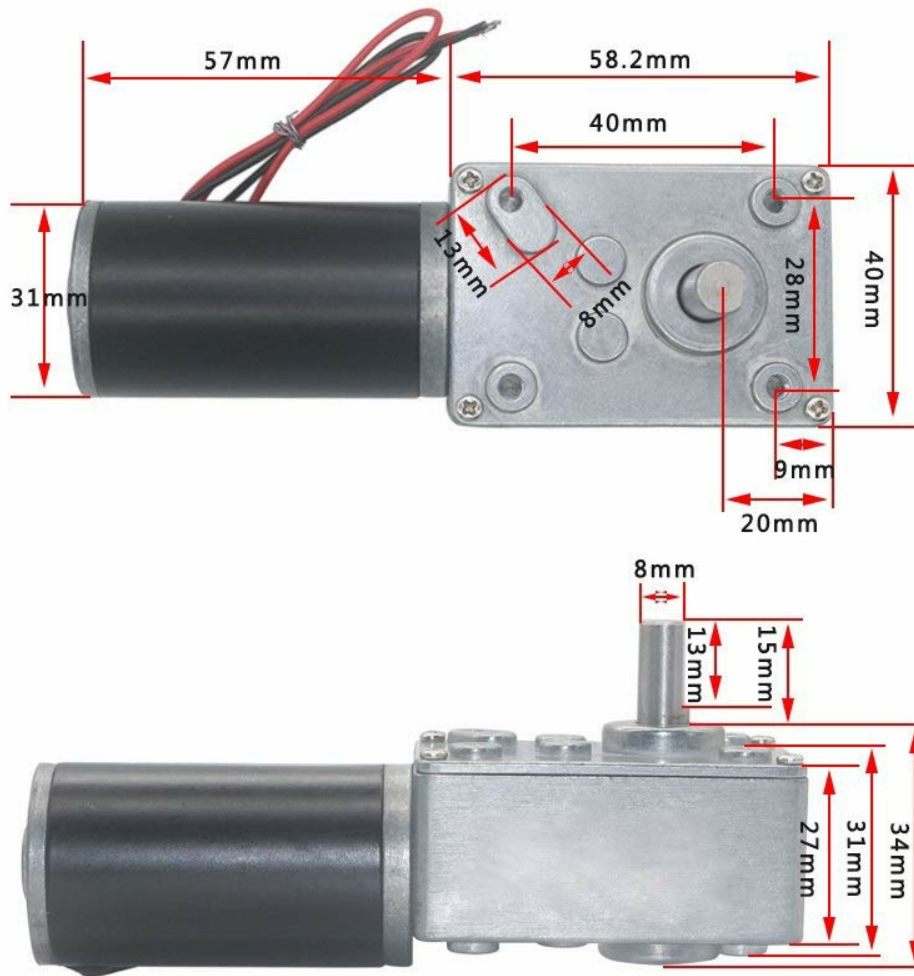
Detailed dimensions of the DollaTek 31ZY DC 12V 80RPM Turbo Gear Motor. This diagram provides critical measurements for integration and mounting.
